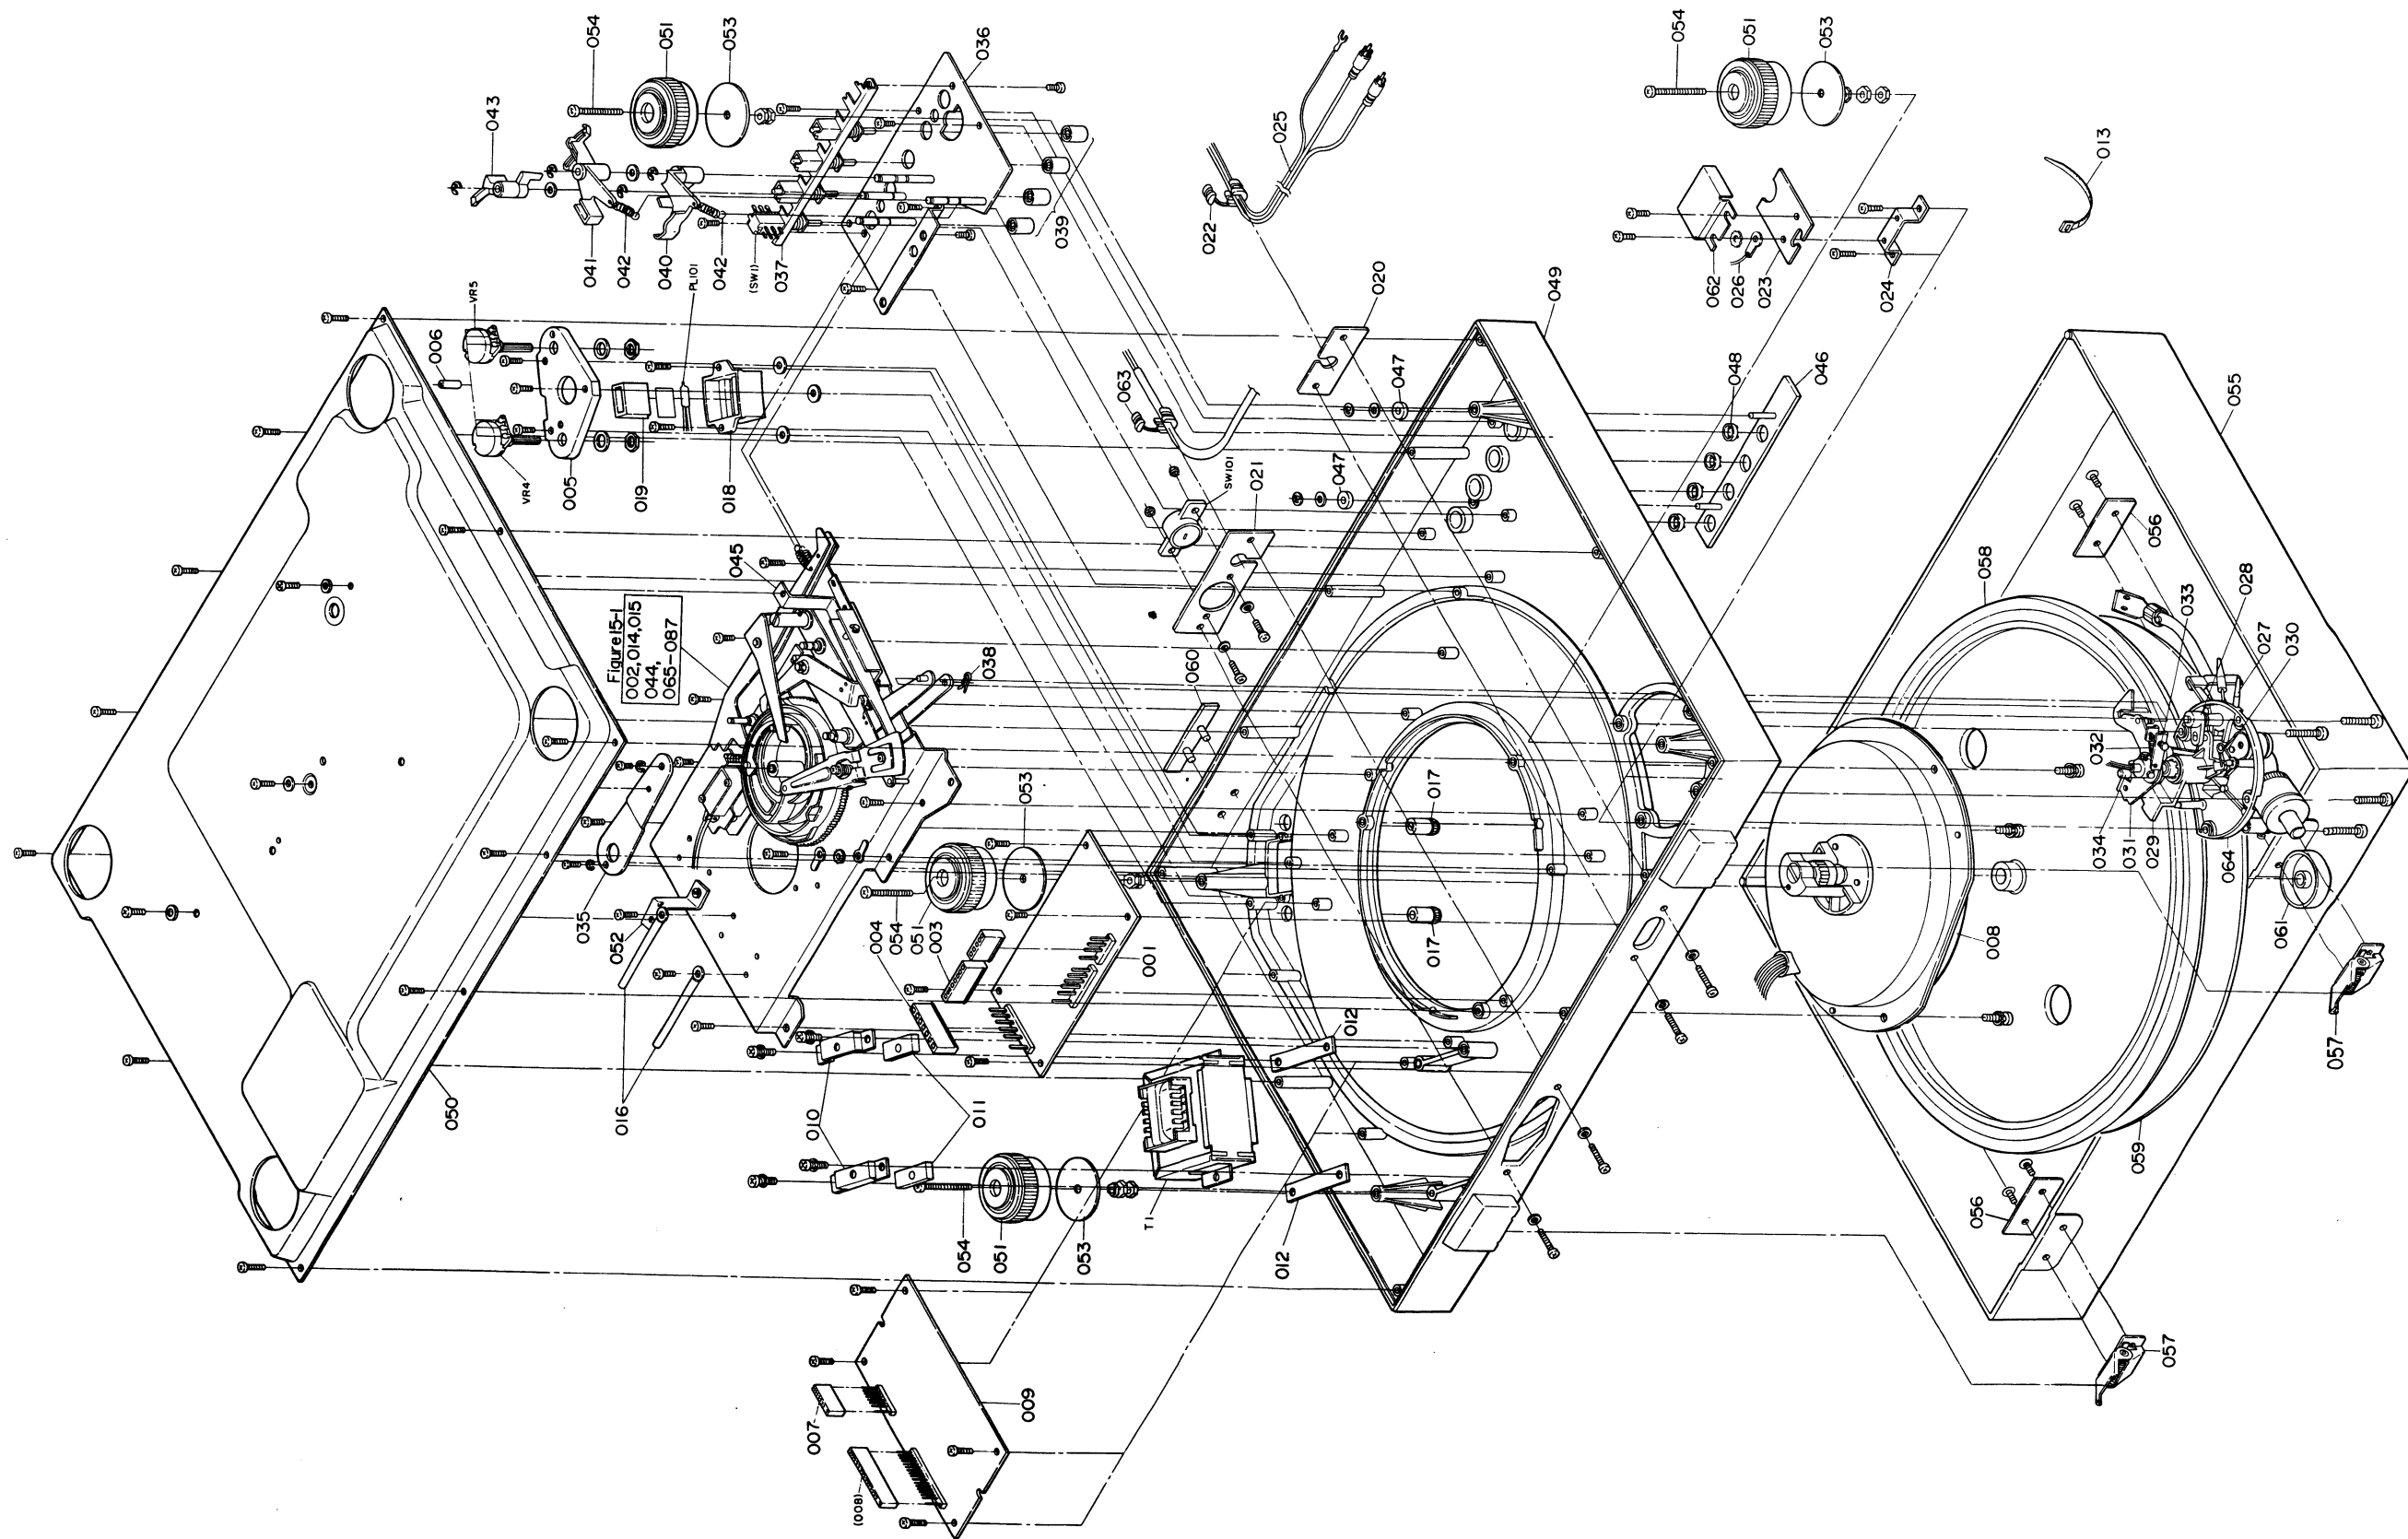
PLAYER EXPLODED VIEW (Cabinet)
